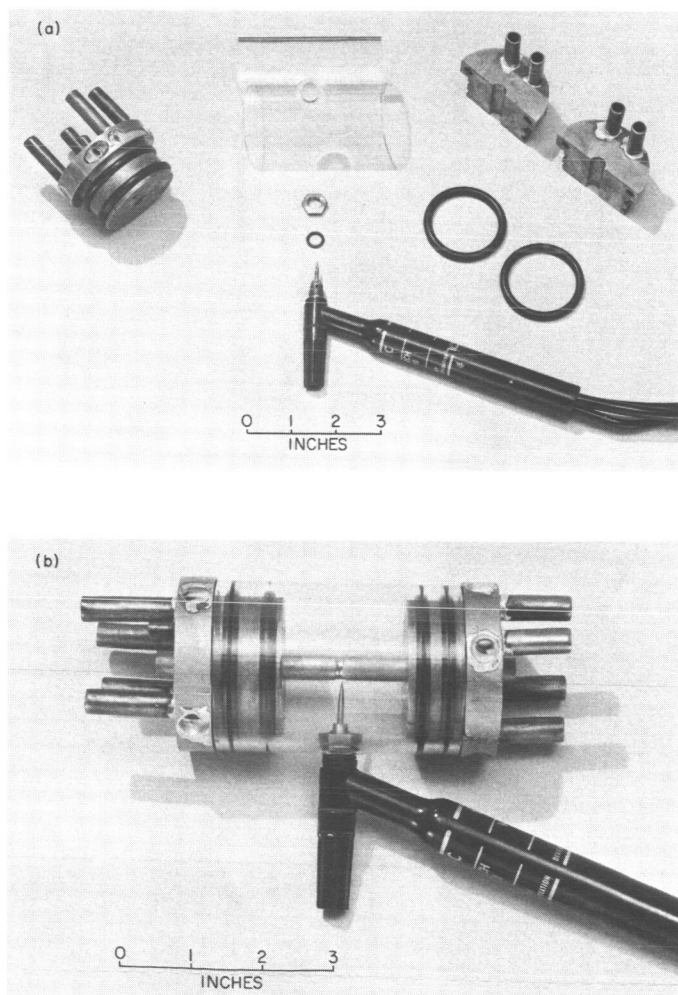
TIG field welder (a) unassembled (b) assembled
